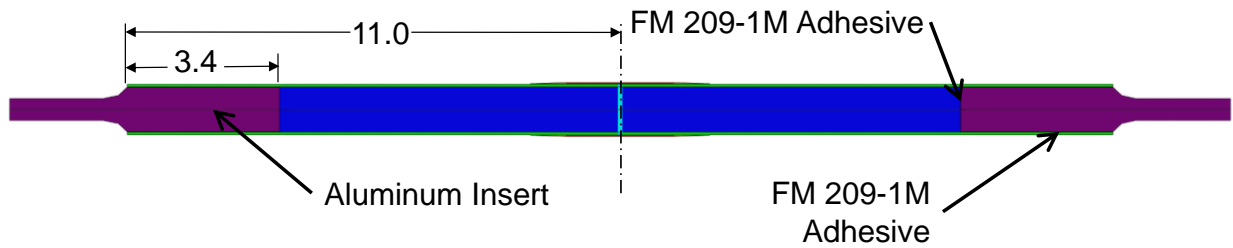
Jointed composite sandwich panel, prior to cutting into test specimens.
